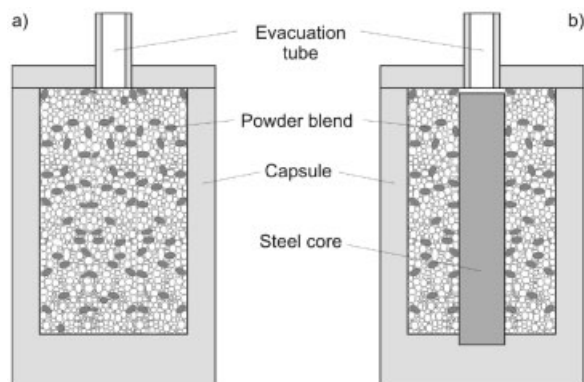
Cross sections of a capsule for : a) full MMC rods, b) co-extrusion of a steel core to be clad with a wear resistant MMC-layer. Extrusion of sheet capsules protects the powder blends from oxidation [5].
